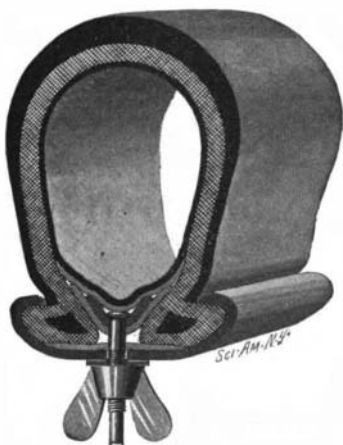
Double-Tube Clincher Tire with Locking Bolts.
